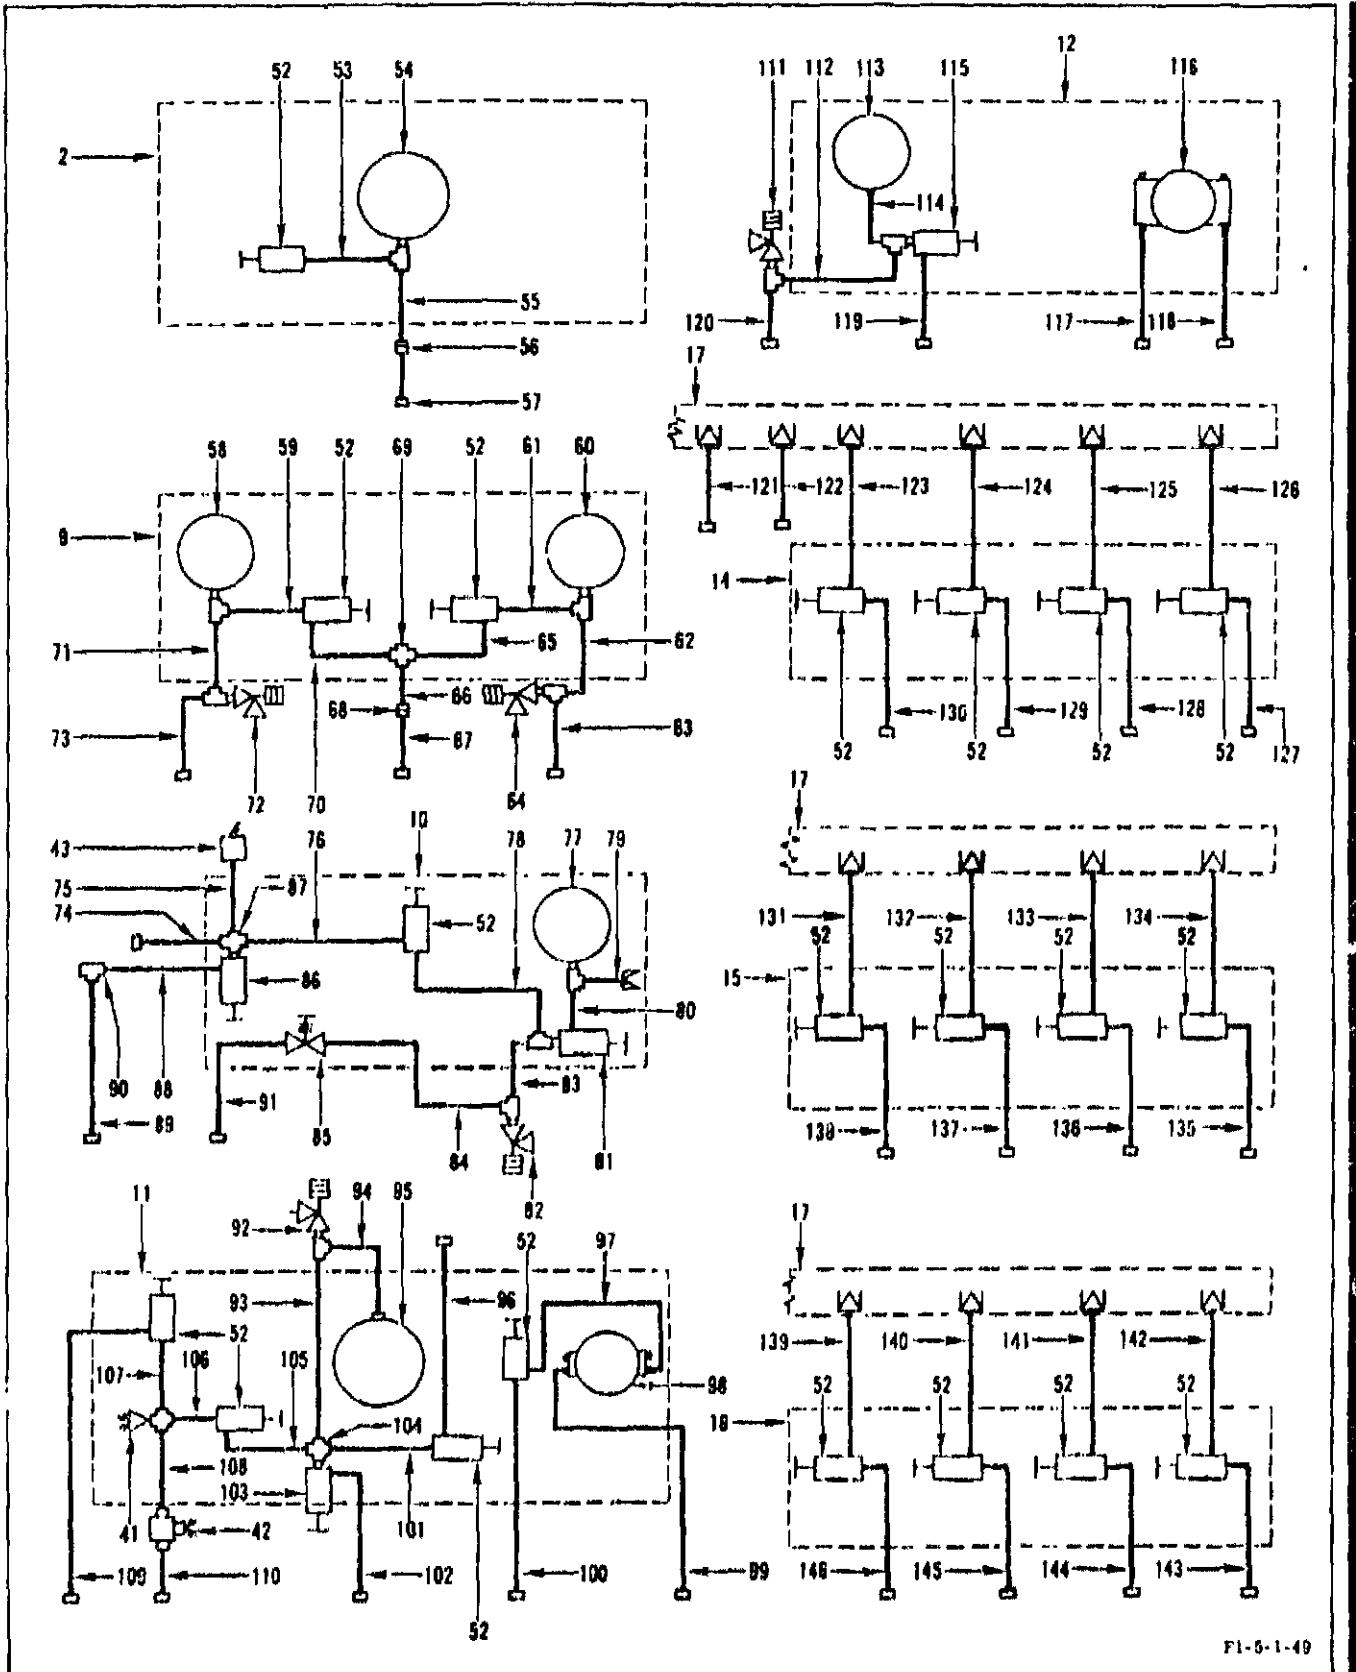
Disassembly of Components Test Console (Sheet 2 of 25)
